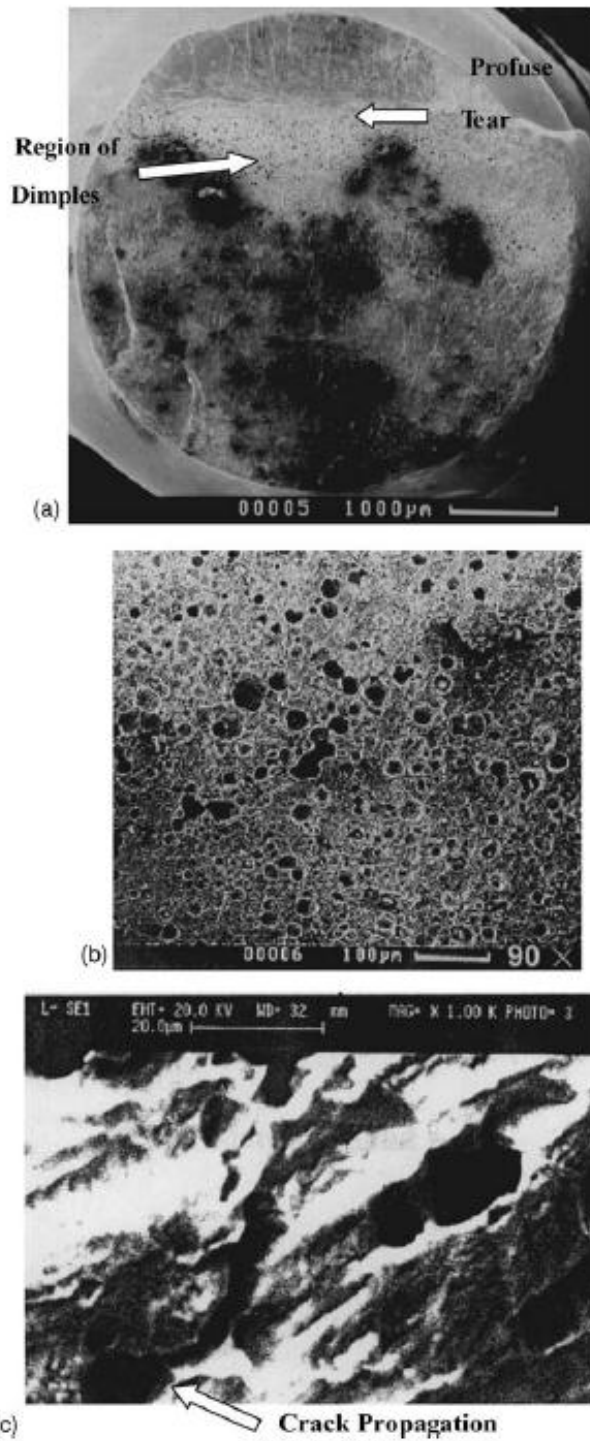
SEM image of broken screw fracture surface. (A) Regions of dimples and profuse tear, (B) Close-up view of dimples (90x), (C) Evidence of crack propagation. [11]
